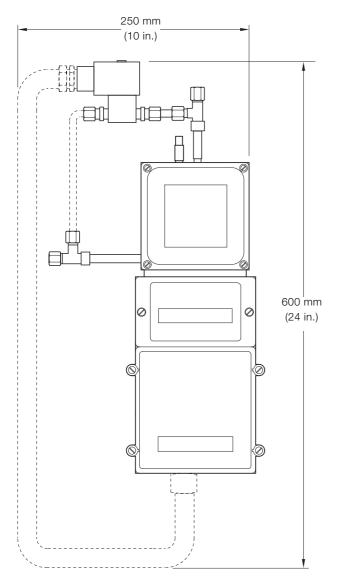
Sensor assembly with blowback assembly fitted (nominal dimensions)
